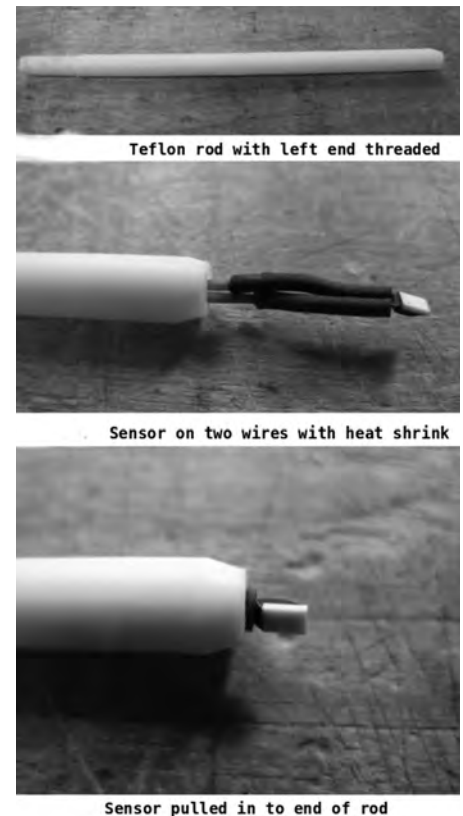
Teflon rod (top image), the sensor soldered to a twisted pair of Teflon-insulated stranded wire with the solder joints covered with small heat-shrink tubing (middle image), and (bottom image) the sensor pulled into the end of the rod.
